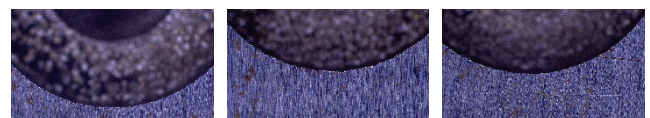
Workpiece surface for the printed and 400 °C heat treated EDM electrode (samples 1, 7, 9)
